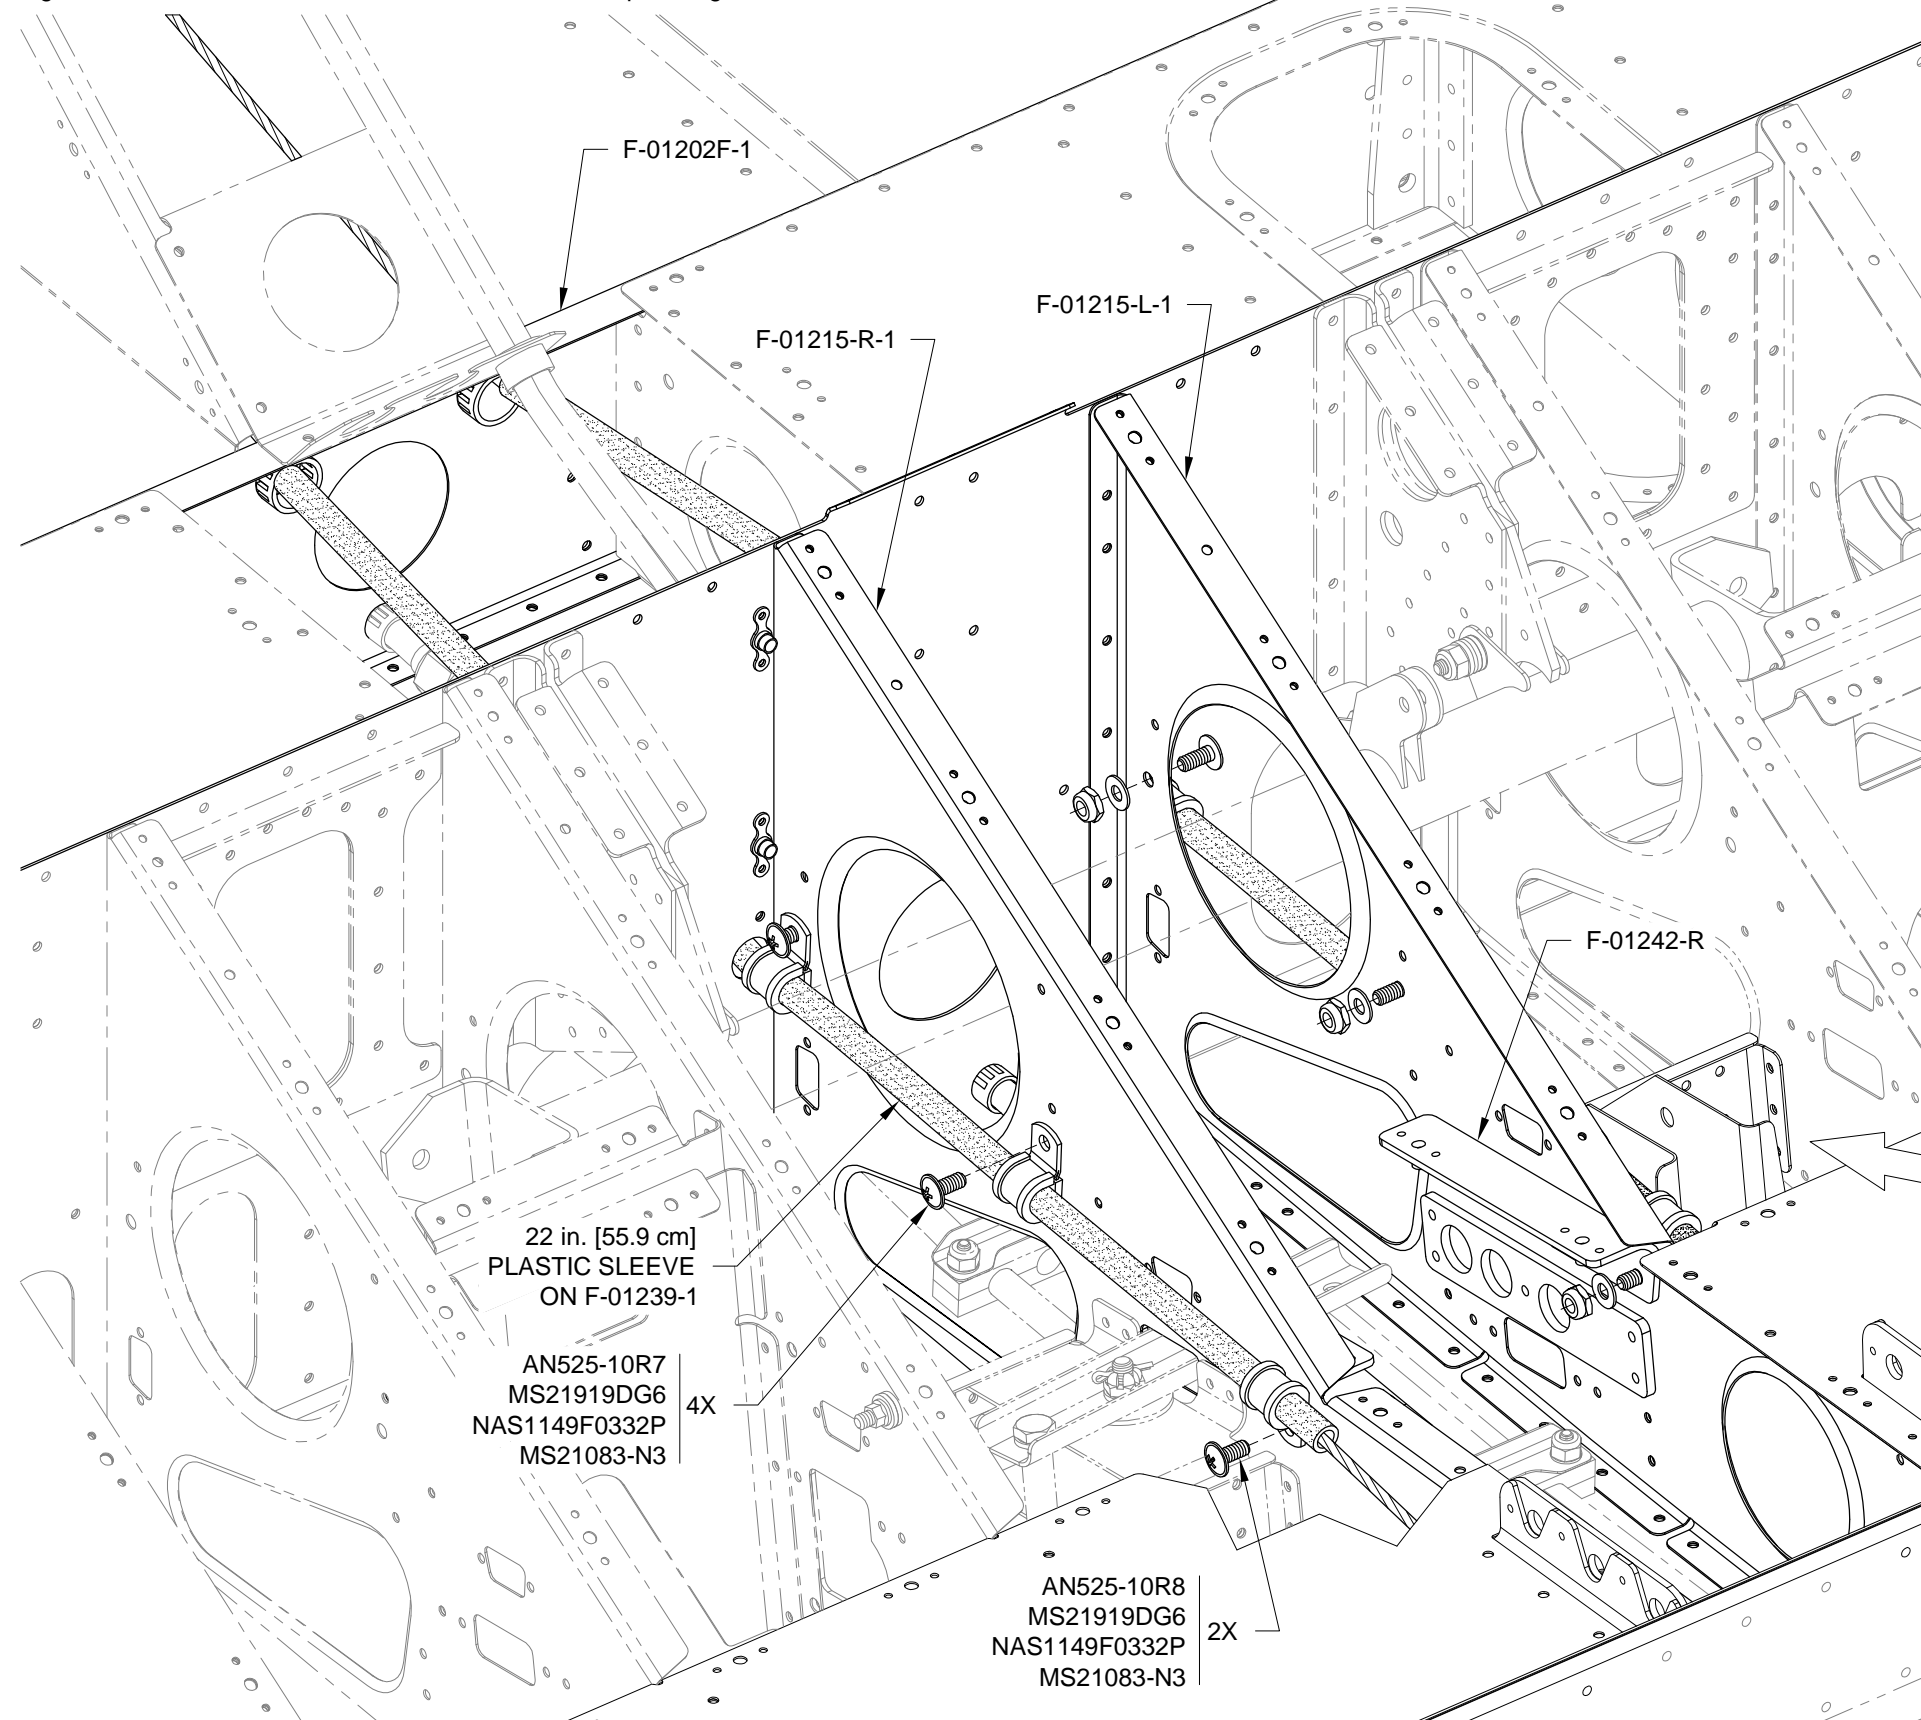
SECURING THE RUDDER CABLE FORWARD PLASTIC SLEEVES
